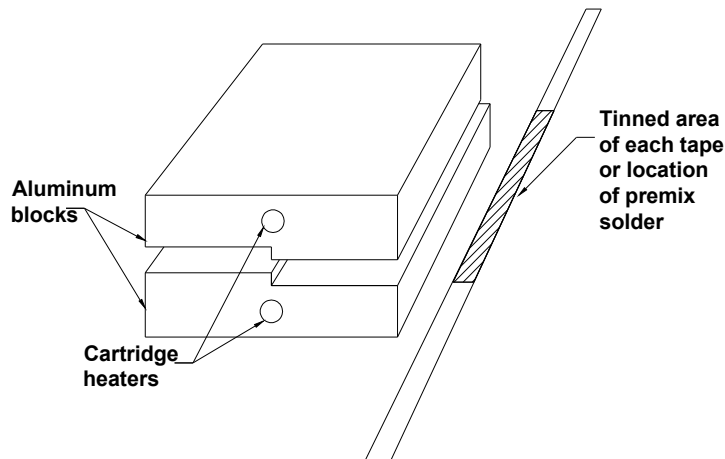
Aluminum heater fixture used to fabricate YBCO coated conductor solder joints with premixed solder paste.
